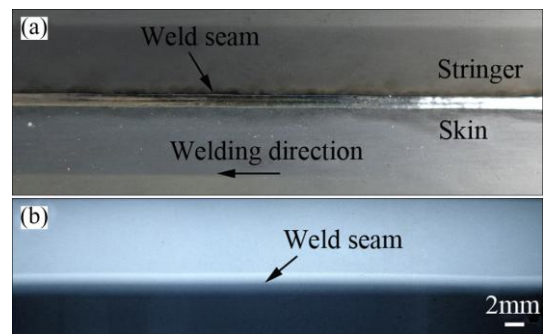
Formation of weld seam: (a) Surface; (b) Inner
